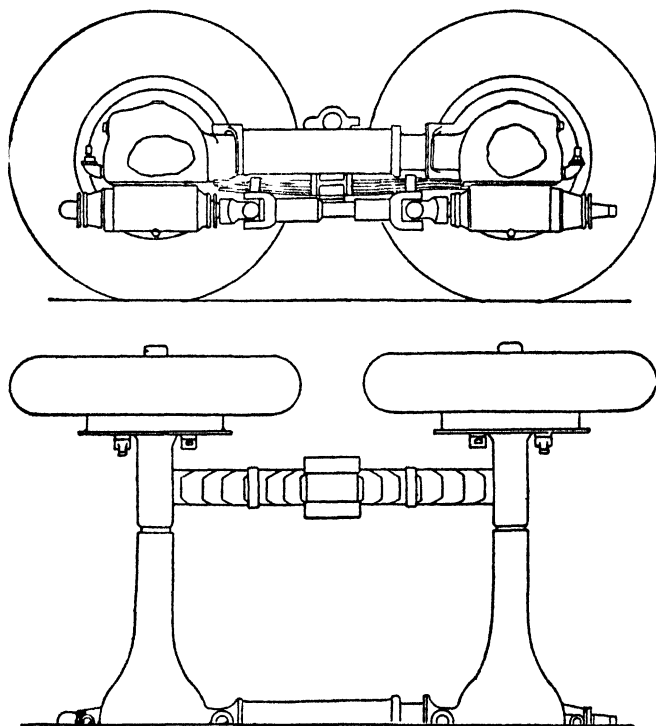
SIDE VIEW AND HALF PLAN OF SAFEWAY FOUR-WHEEL BOGIE.
